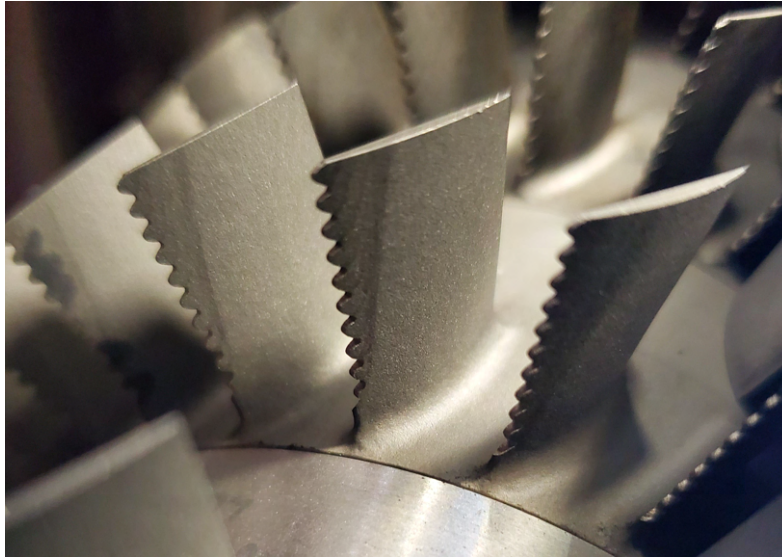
Tubercle modified leading edge of compressor rotor blade
